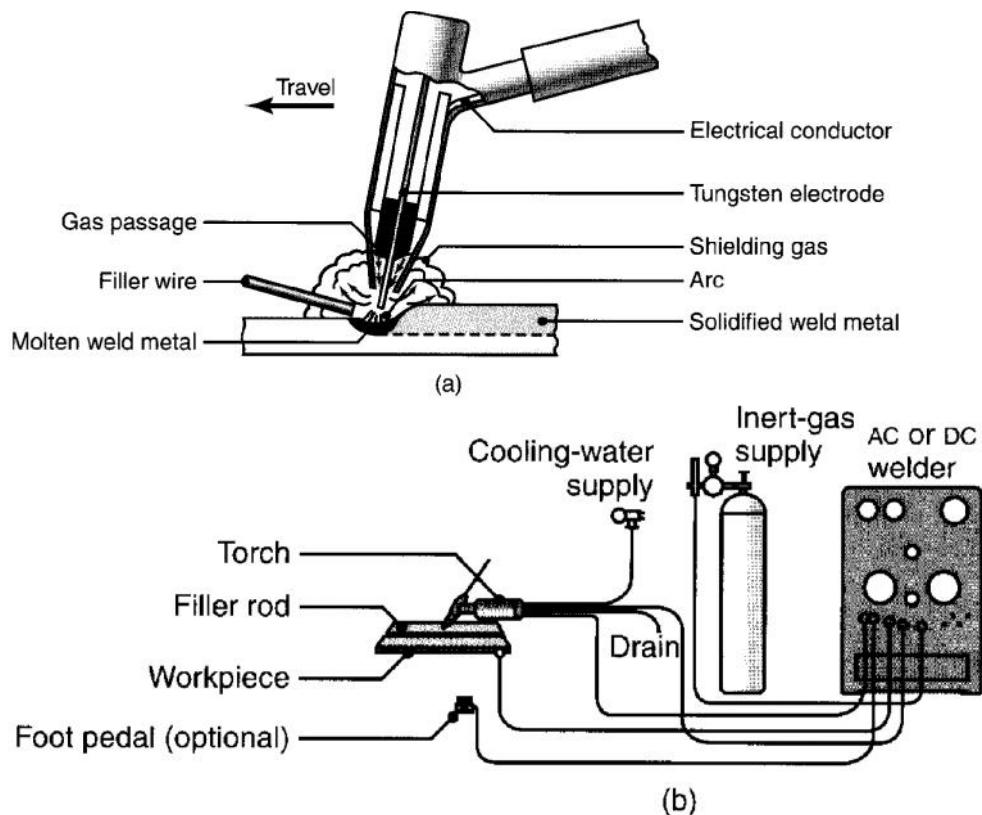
FIGURE (a) The gas tungsten-arc welding process, formerly known as TIG (for tungsten-inert-gas) welding. (b) Equipment for gas tungsten-arc welding operations.
